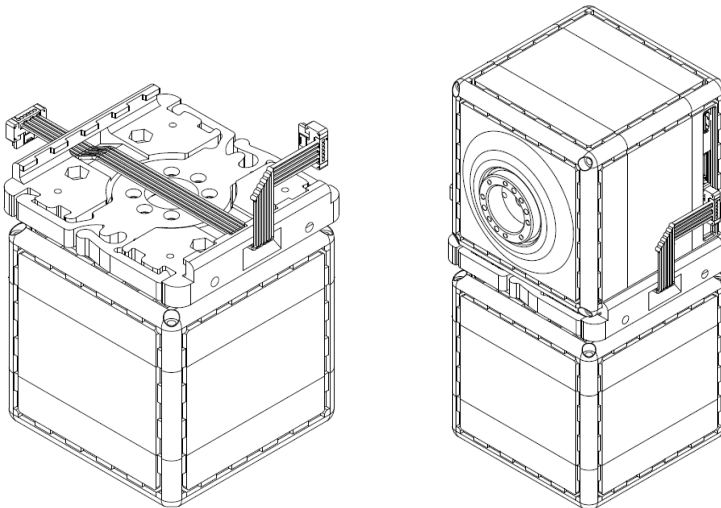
Second possible ERNI cable routing inside a flat flange
